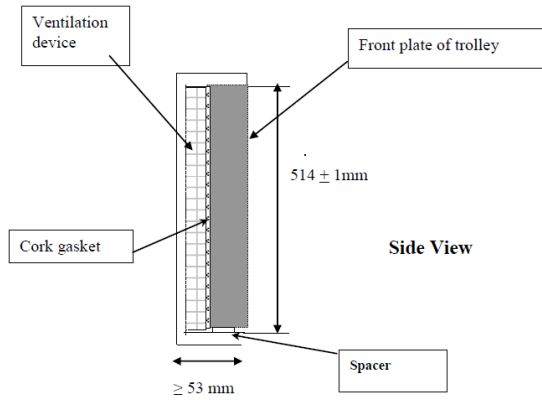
Attachment of backplate to ventilation device and trolley face plate
